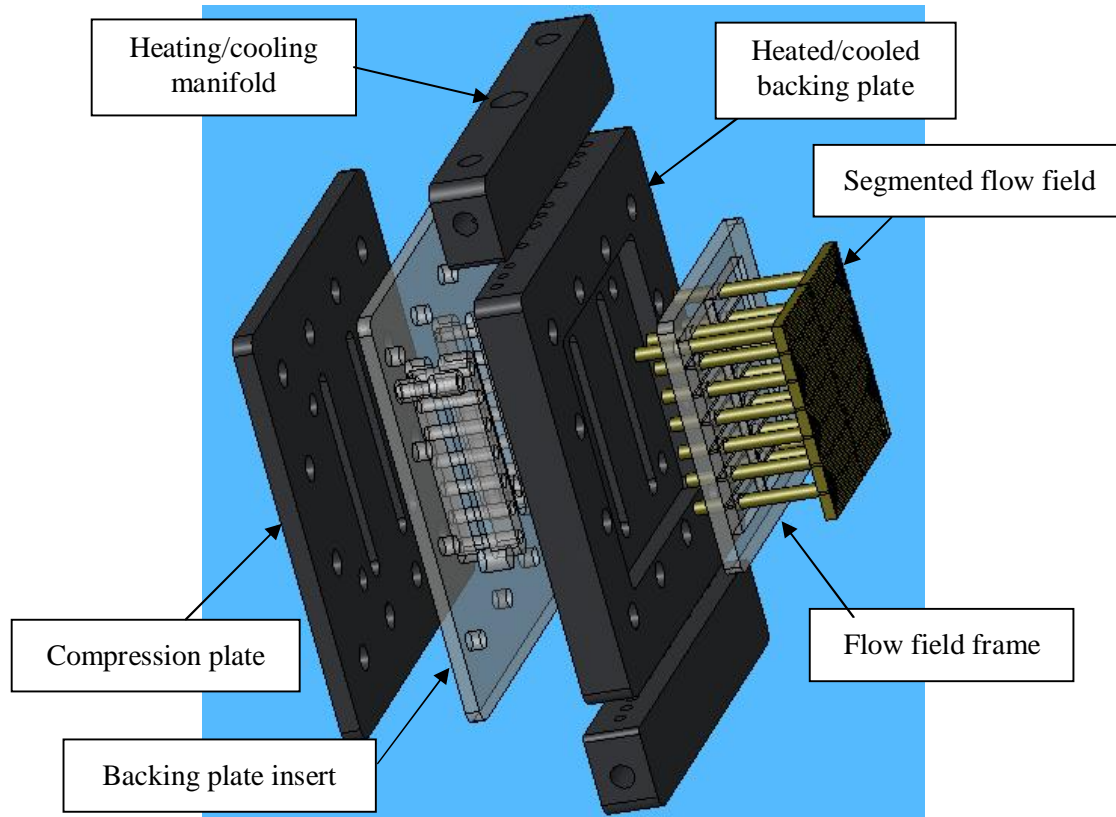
3-D CAD drawing of the left half of the highly instrumented fuel cell [99]
